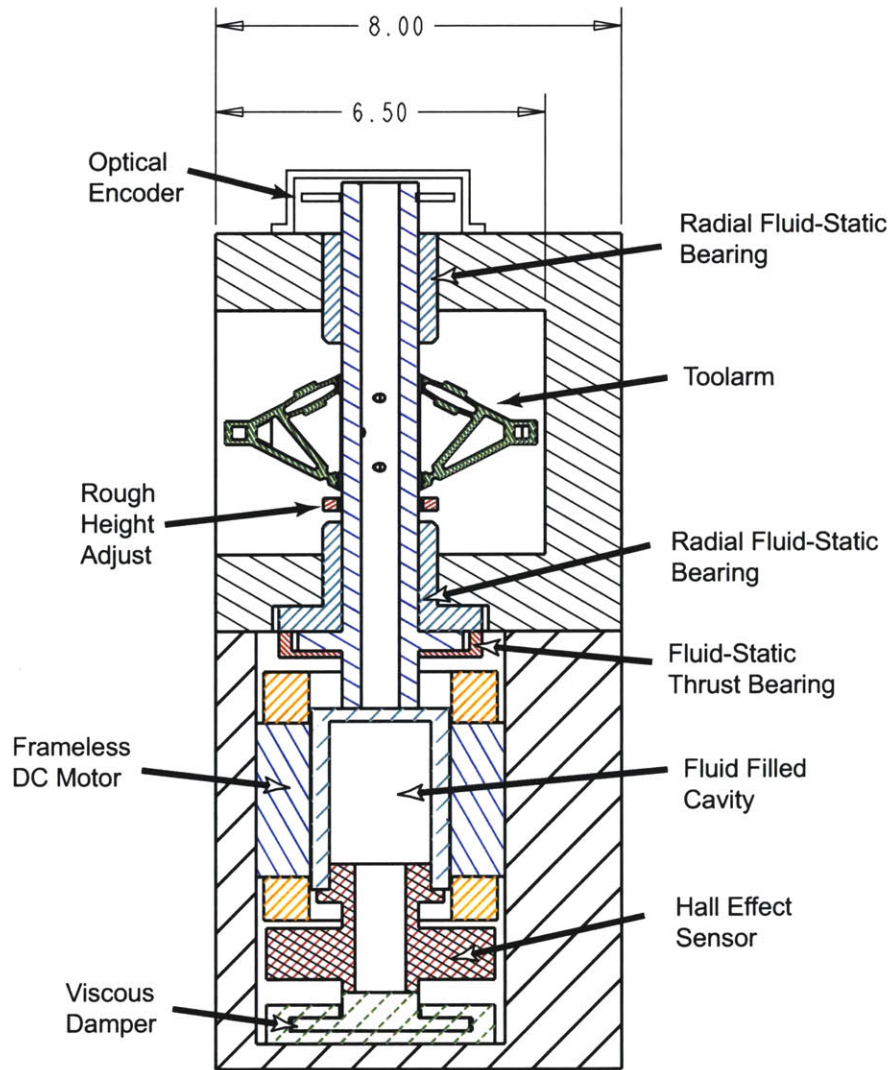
Cross-section schematic of a proposed rotary fast tool servo with fluid-static bearings and frameless motor.
